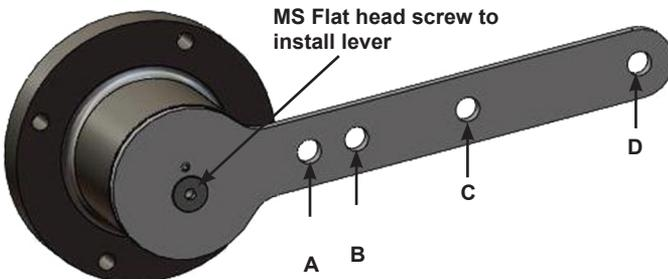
Magnet Holder and Standard Lever for Reciprocating Valves
